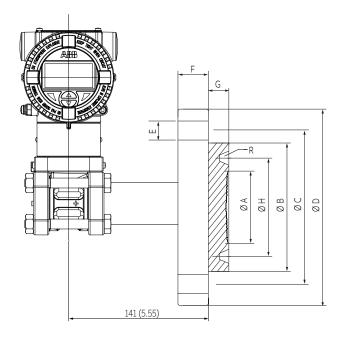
S26RR Rotating flange diaphragm seals - Ring Joint (RJ)
